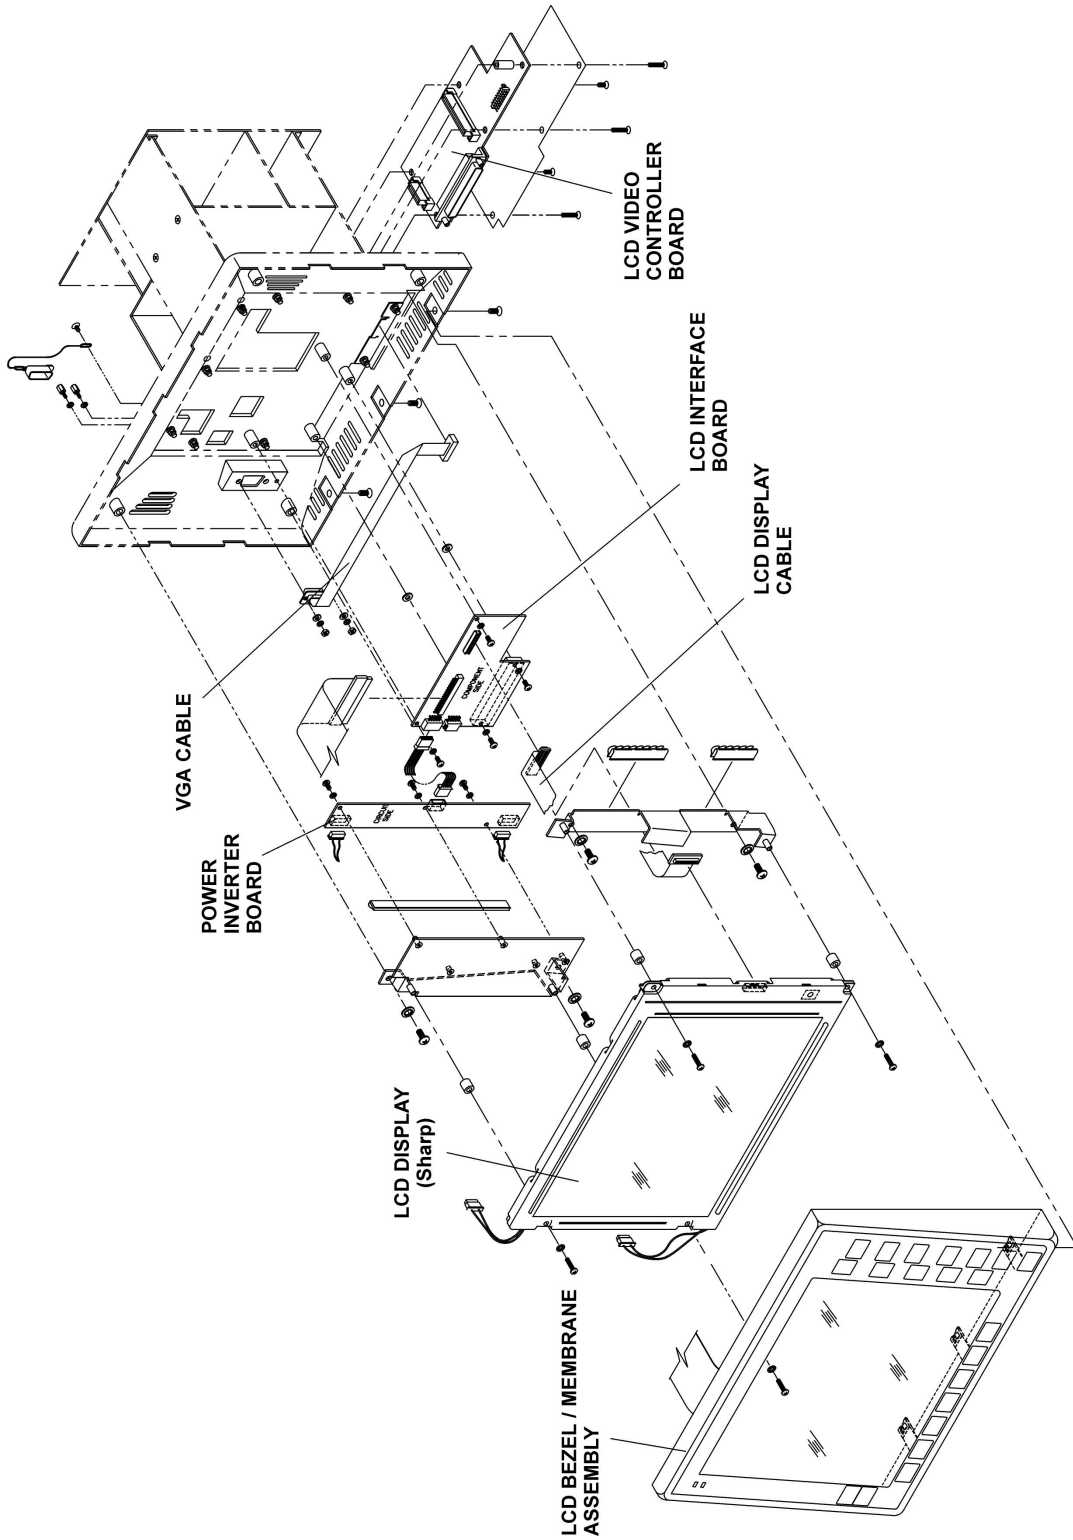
PRISM Color Display Assembly (CPU Board 403023 ONLY)
